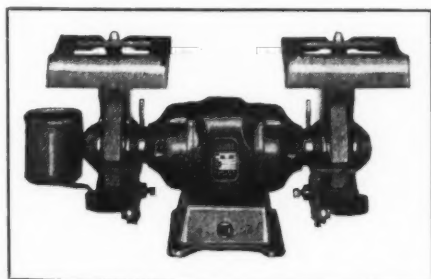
Baldor No. 724 Grinder with Shatter-proof Glass Eye-shields
